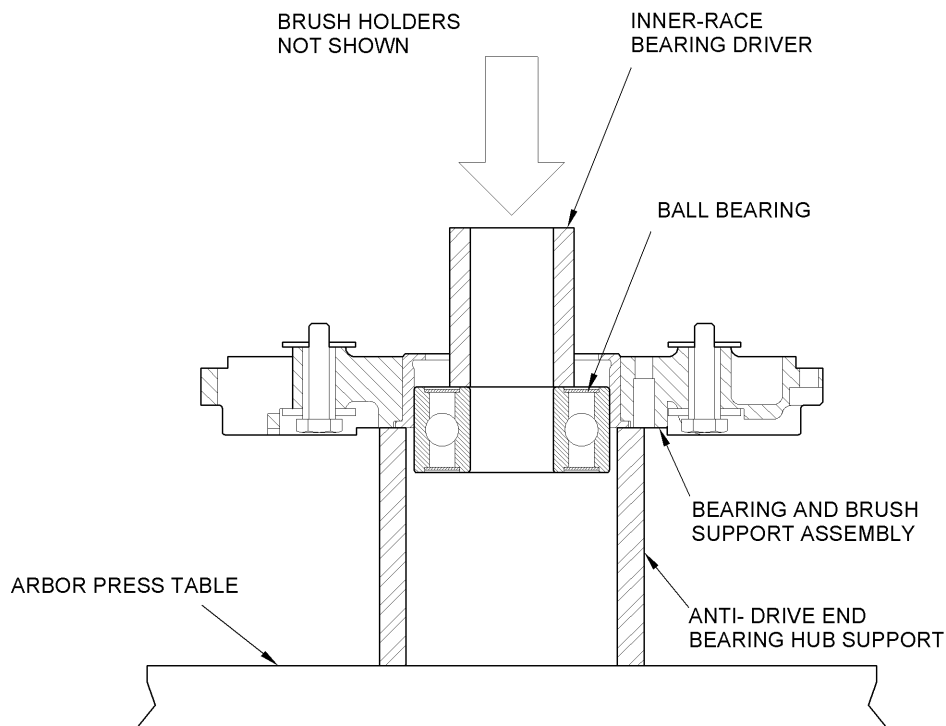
Removing Bearing from Bearing and Brush Support Assembly
